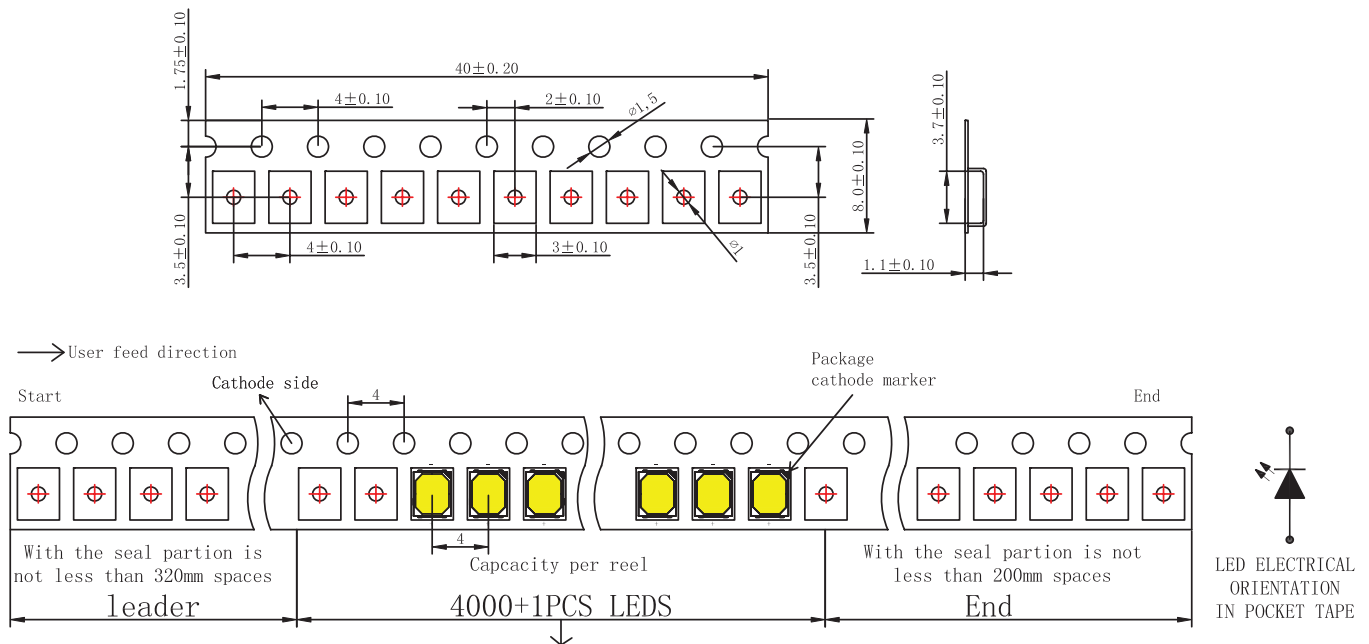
Pocket tape dimensions for LUXEON 2835 Line.
